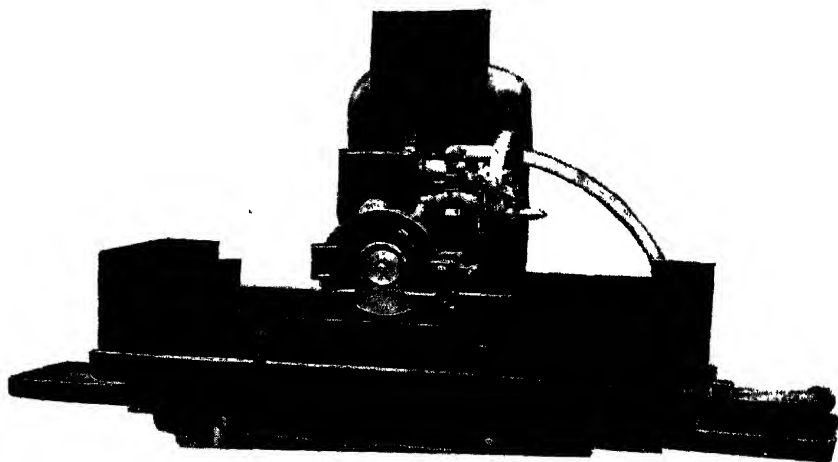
SURFACE GRINDER ARRANGED FOR WET GRINDING
